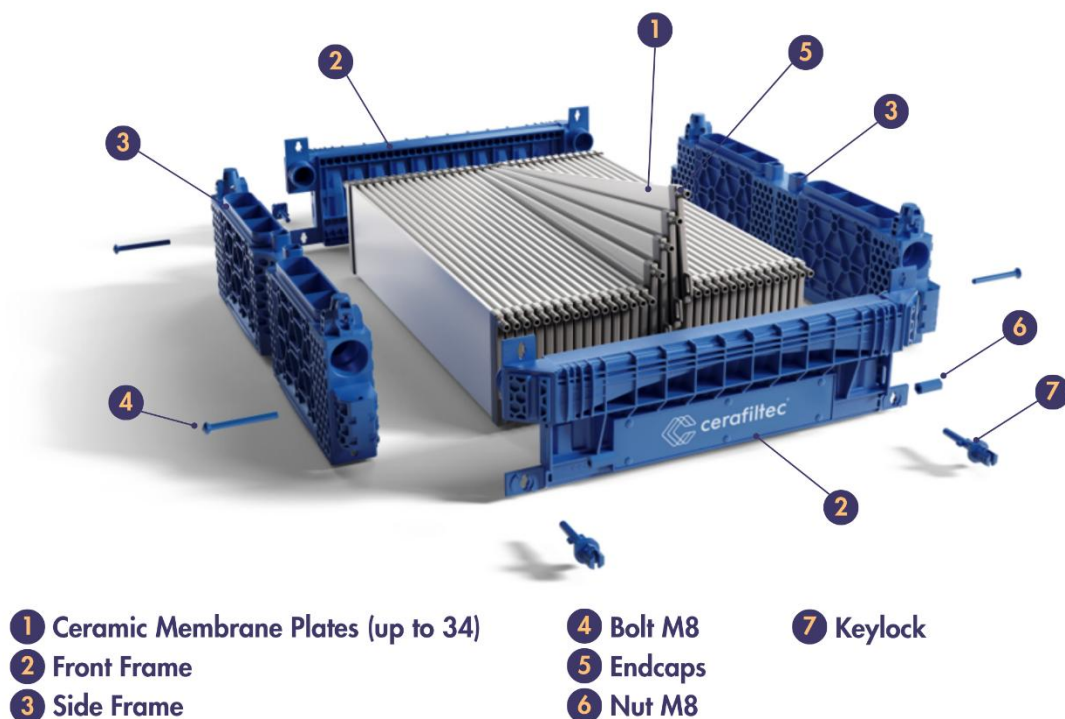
Exploded view of the Cerafiltec module showing the main components and assembly.
